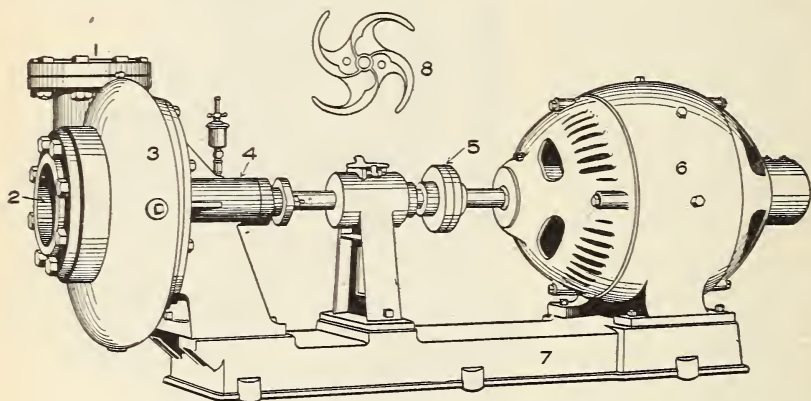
Single-stage centrifugal pump direct connected to electric motor, showing an open-type impeller. 1, Discharge; 2, suction; 3, pump volute or case; 4, stuffing box; 5, coupling; 6, electric motor; 7, base; 8, impeller.
